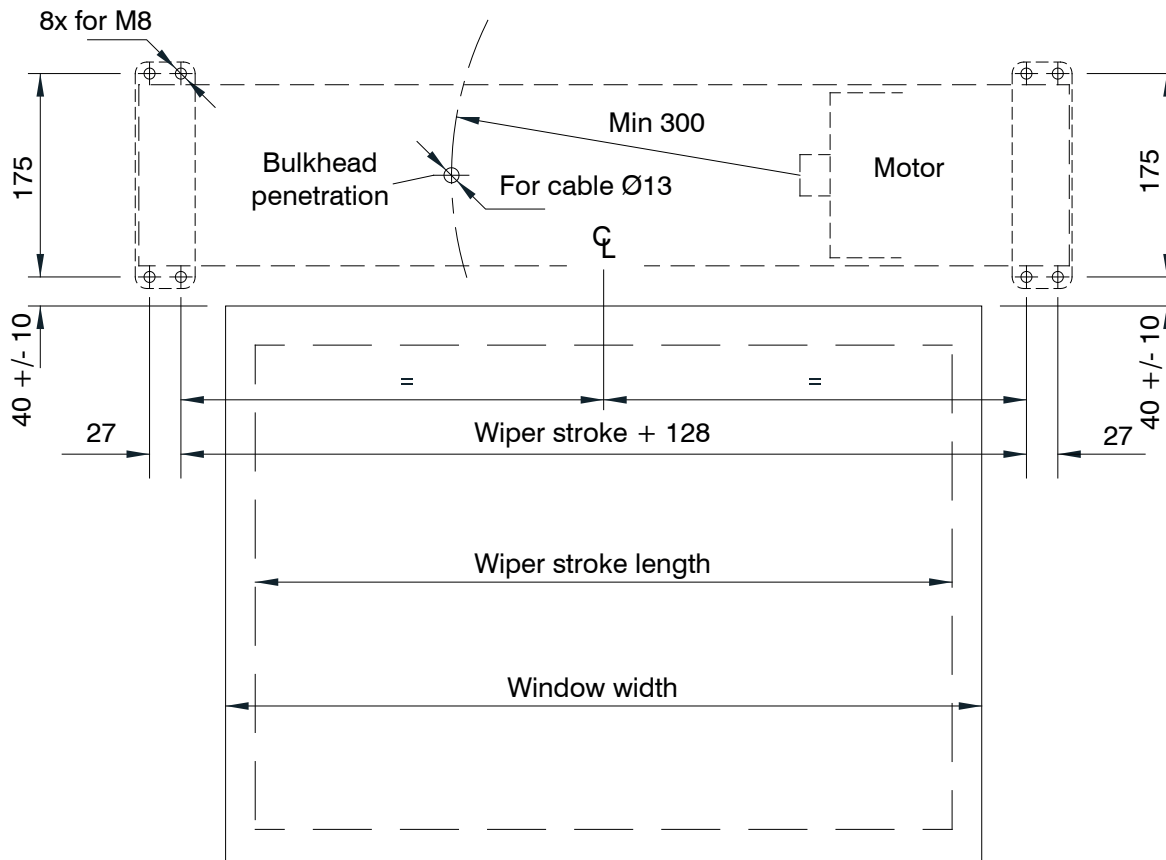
Wiper Unit Footprint (all measurements in mm)
